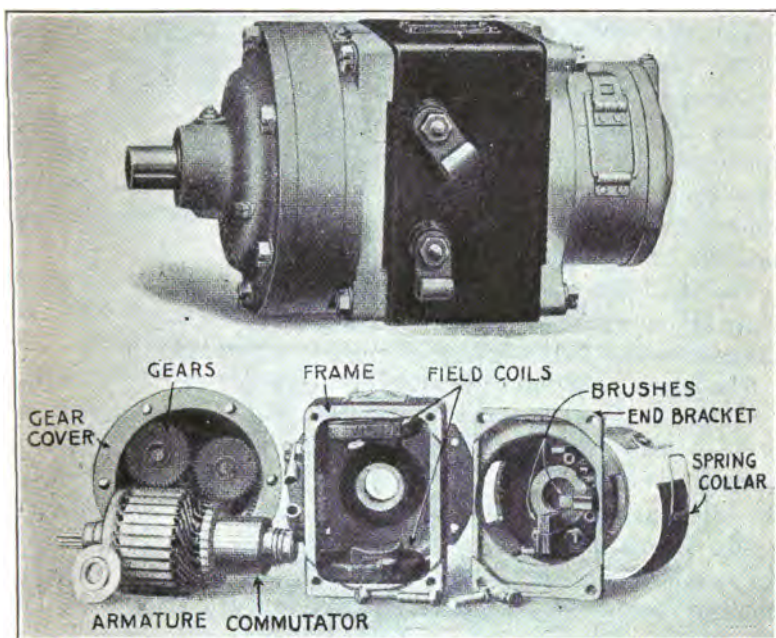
Westinghouse Starting Motor with Self-Contained Planetary Speed Reduction Gearing.
